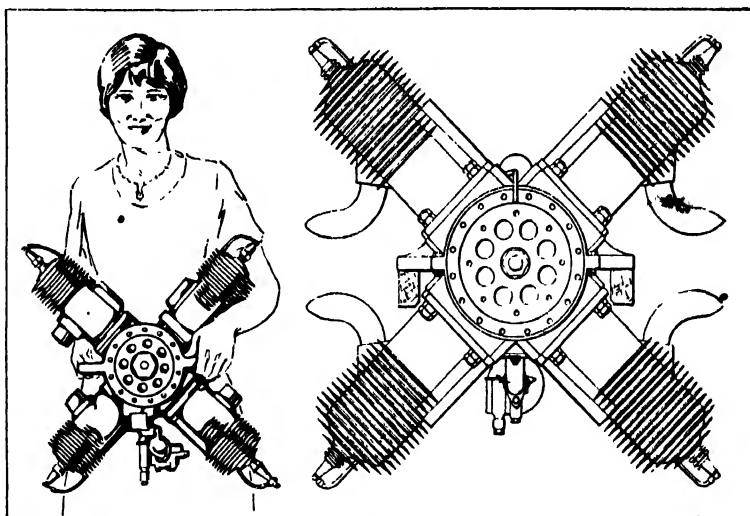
Meteormotor Radial Air-Cooled Engine, a Four Cylinder Lightweight. View at Left Shows Small Size of the Engine.
